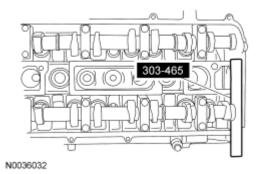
Identifying Special Tool (303-465) In Slots On Rear Of Camshafts Courtesy of FORD MOTOR CO.
